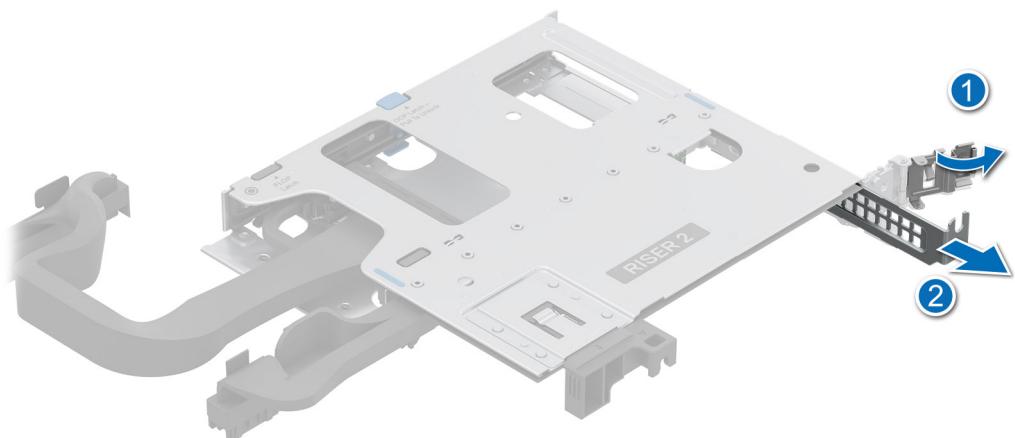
Removing the PCIe blank for the riser 2v or 2k
